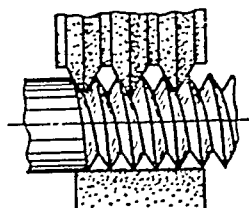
Grinding thread with a multiple-rib wheel having a rib pitch twice the thread pitch
